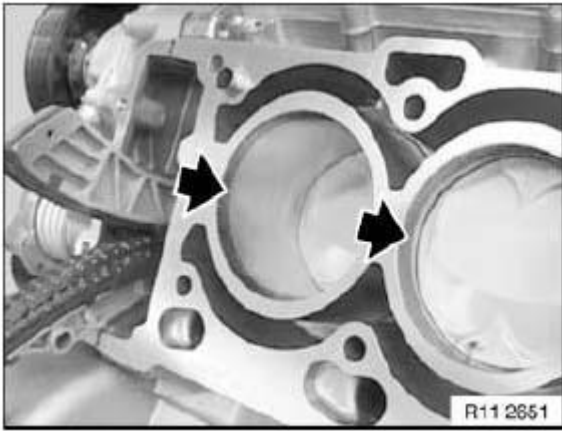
Removing Oil Carbon Residue From Cylinder Wall
